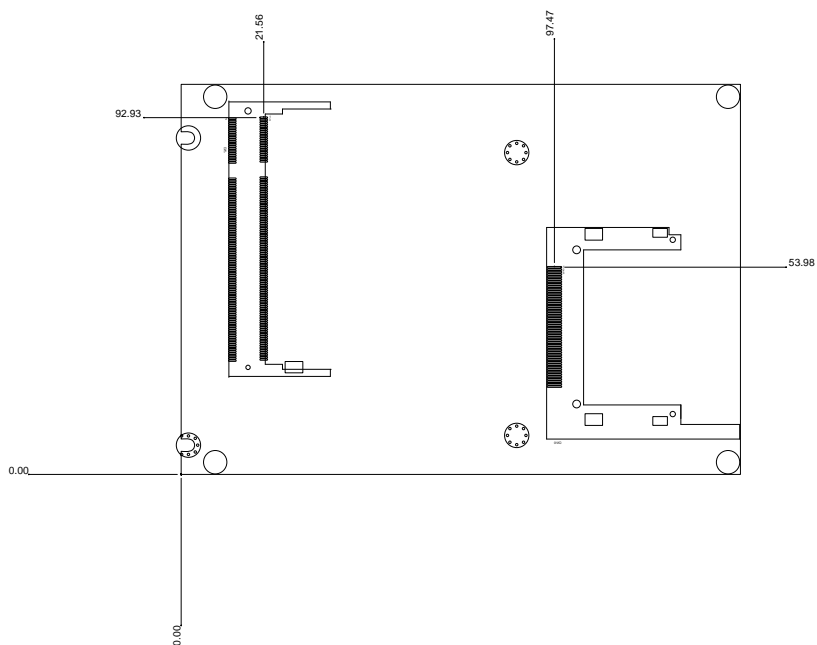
PCM-9375 Mechanical Drawing(Solder side)
